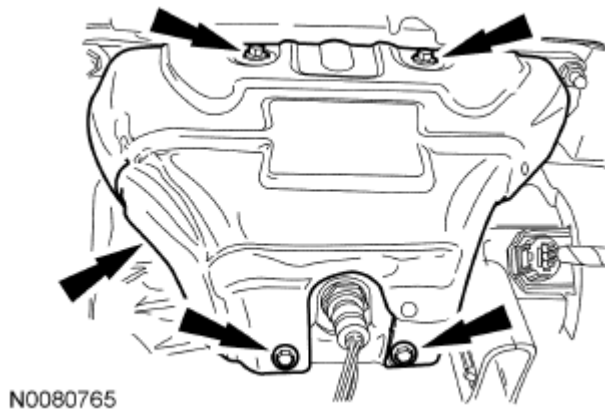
Locating Exhaust Manifold Heat Shield Bolts And Heat Shield
